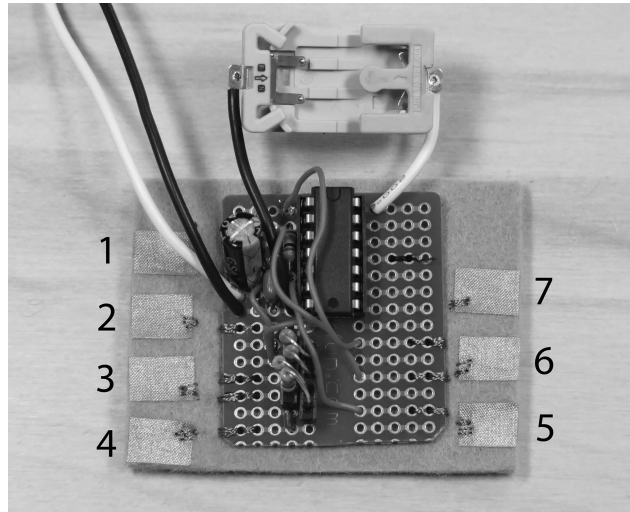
Conductive thread stitches on conductive fabric pad; conductive thread stitches going through protoboard hole.
